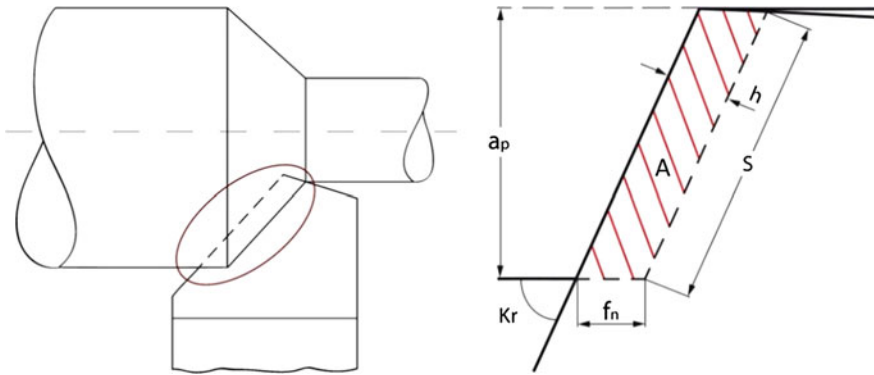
Detailed view of chip section when ignoring tool tip radius
